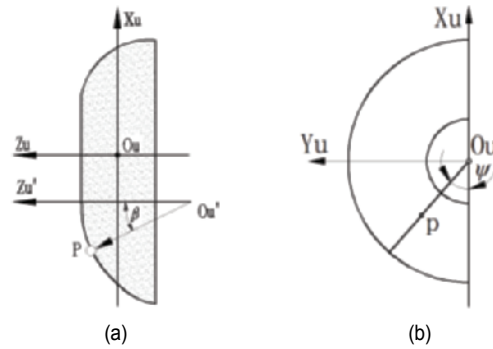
Illustration of cutting surface of grinding wheel: (a) Axial sectional view; (b) transverse sectional view.
